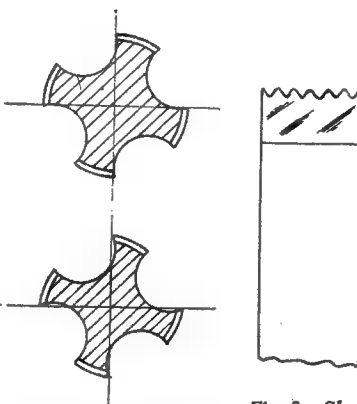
Cut thread tap (top) and form relieved tap (below)
